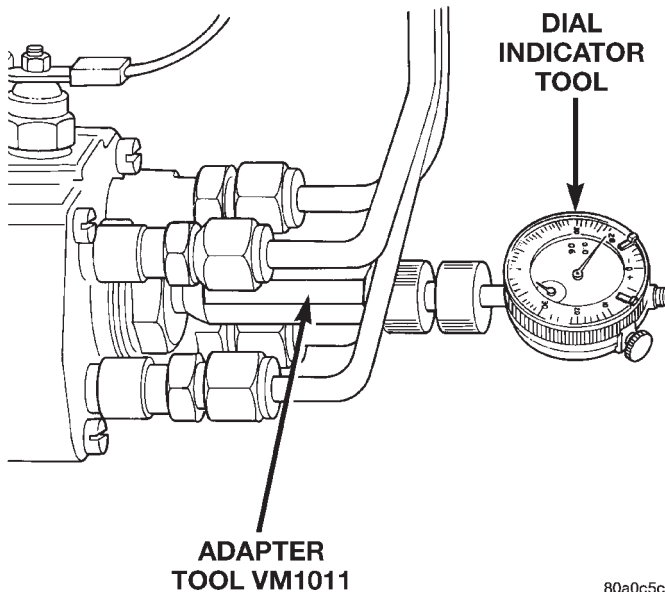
Installing Dial Indicator and Special Adapter Tools
